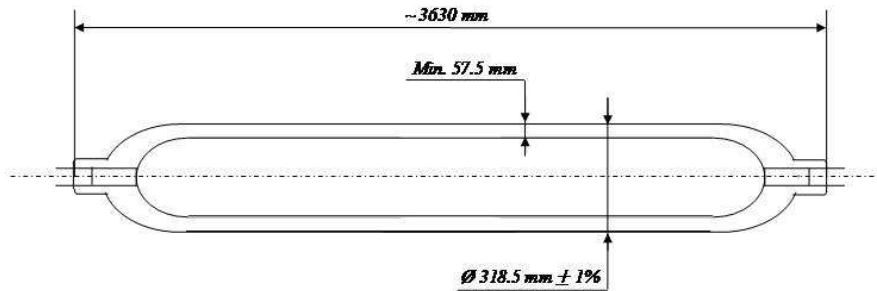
Shape and dimensions of the high pressure hydrogen tank prototype.
